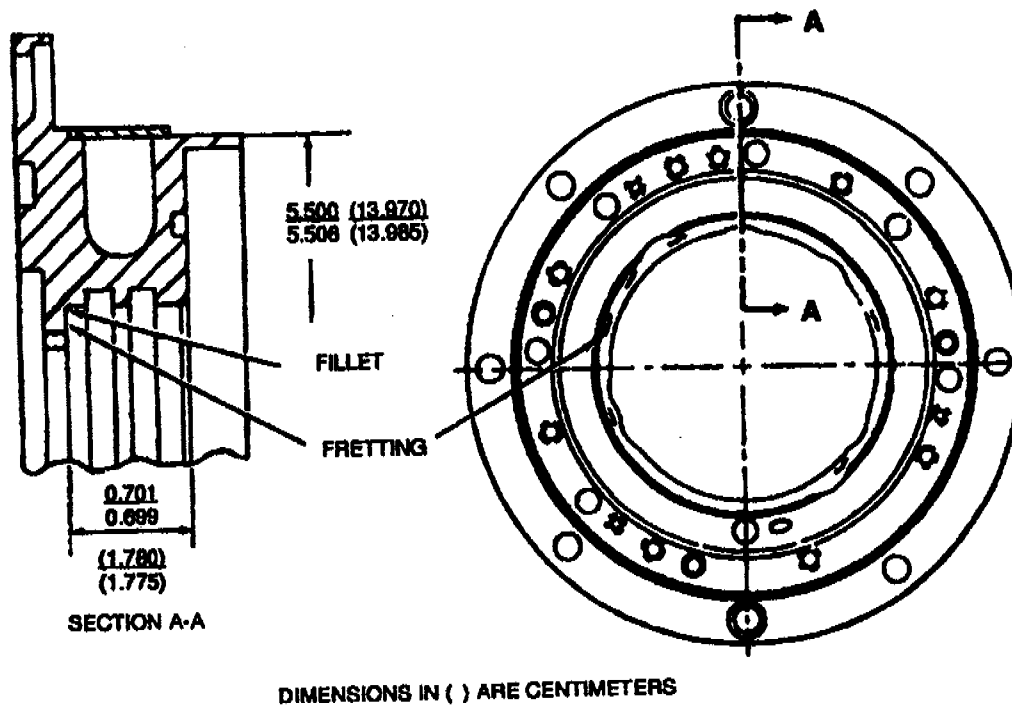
Rear Bearing Housing Inspection.
